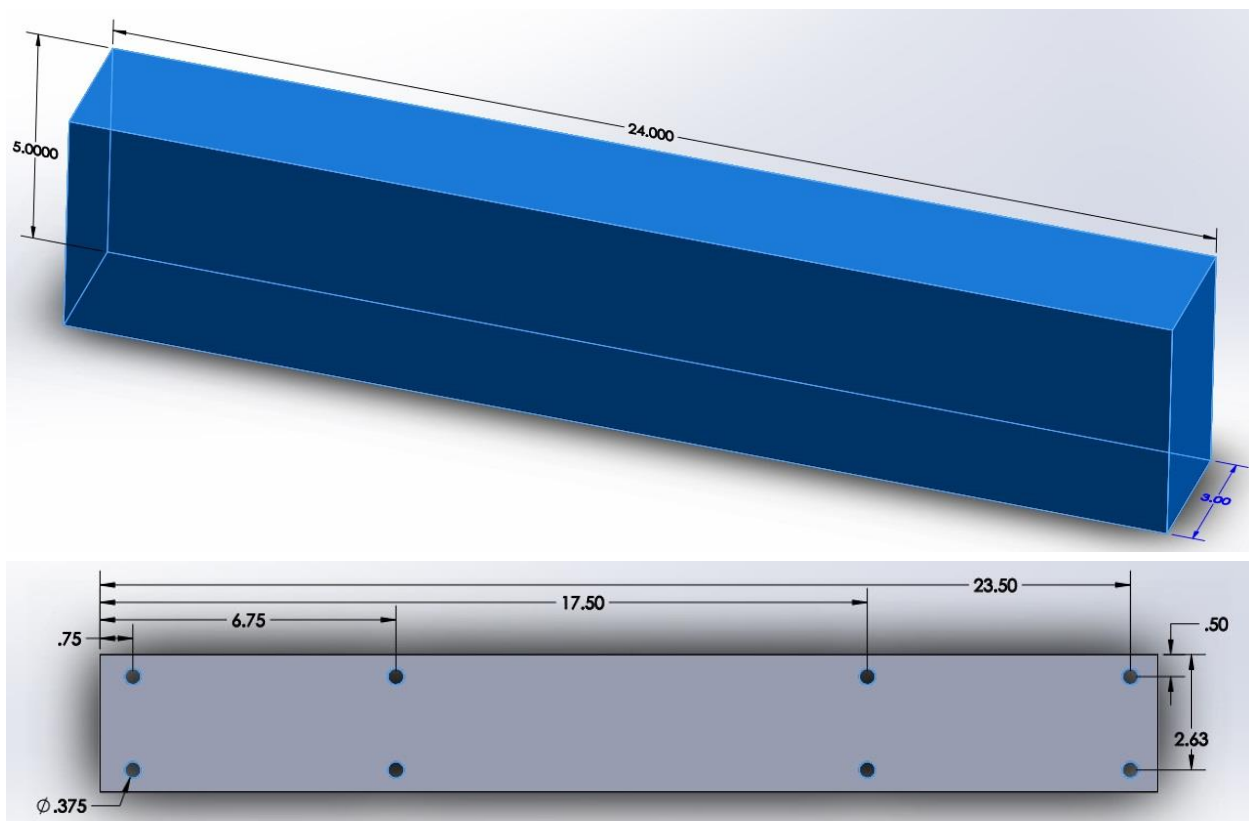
Dimensions of the 3/8 inch holes cut out from top to bottom on the PVC blocks.
